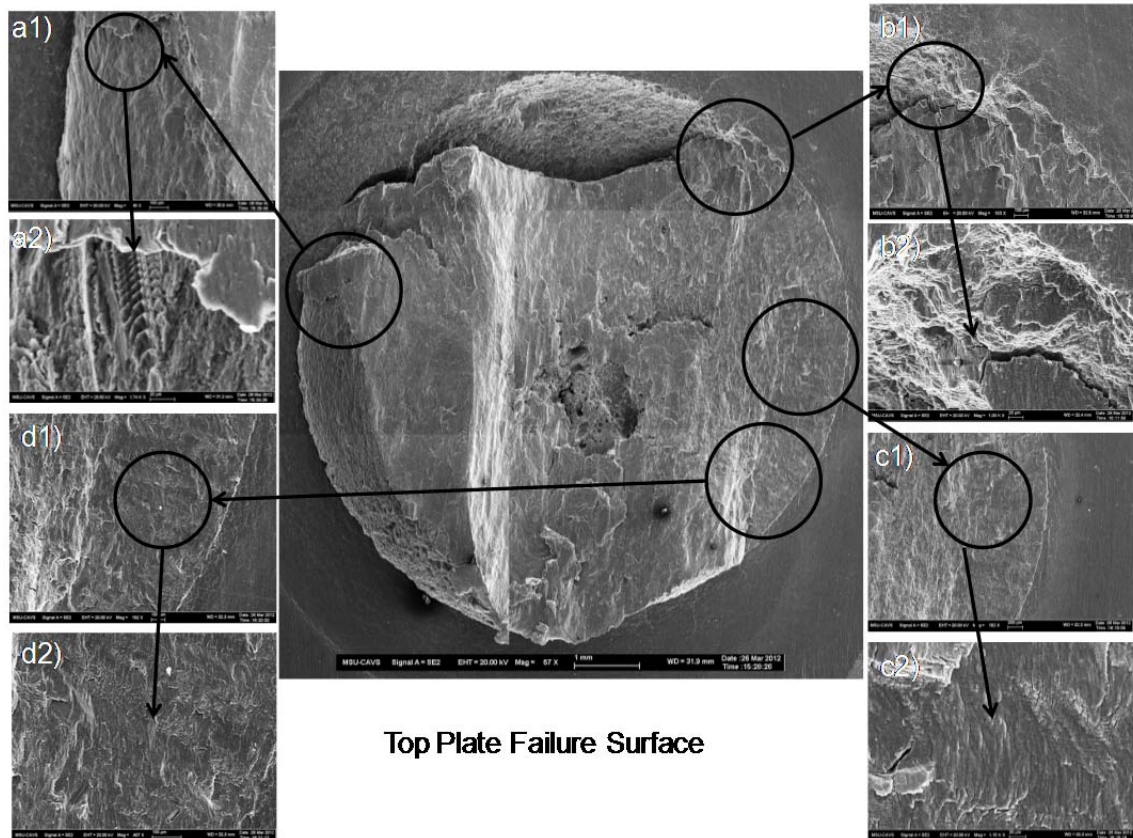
Scanning electron microscope fractography of a fatigue resistance spot welding of specimen #36 top plate at “nominal” condition.
